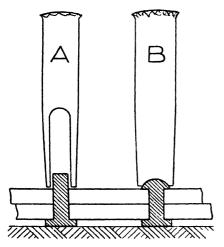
A RIVET SETT (A) AND A RIVET SNAP (B) BOTH PARTLY SECTIONED
